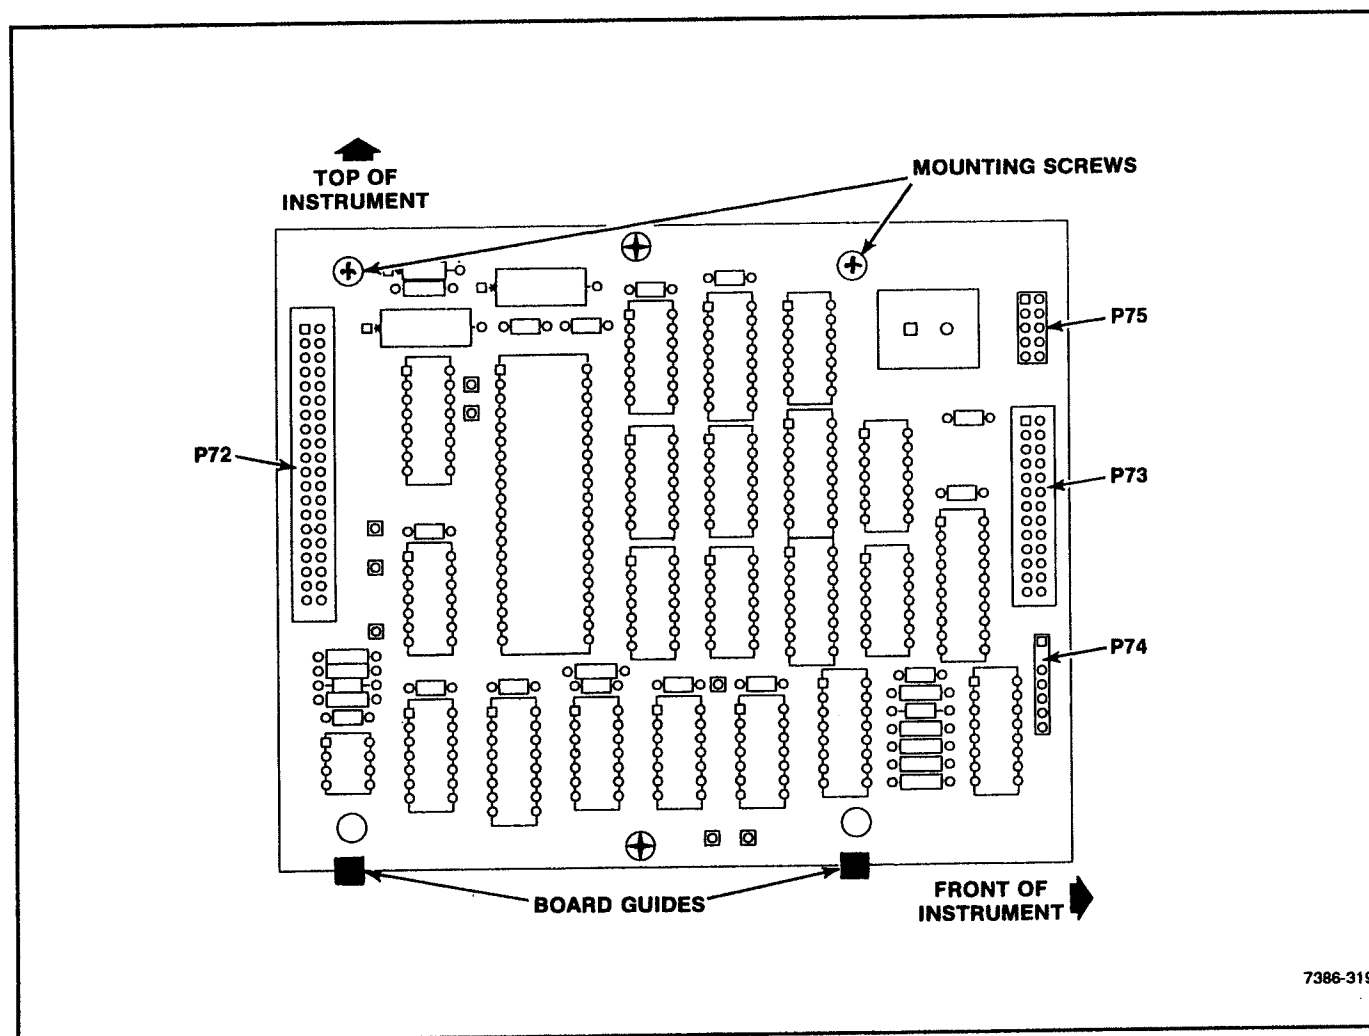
Connector locations for removal of the A10 Front Panel Control board.
